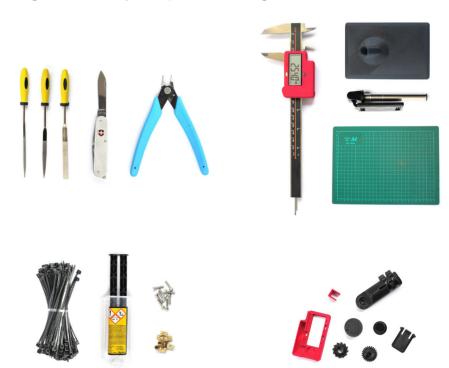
Starter's toolkit with CyberCaliper (upper right), finishing tools (upper left), fasteners (lower left) and samples (lower right).
